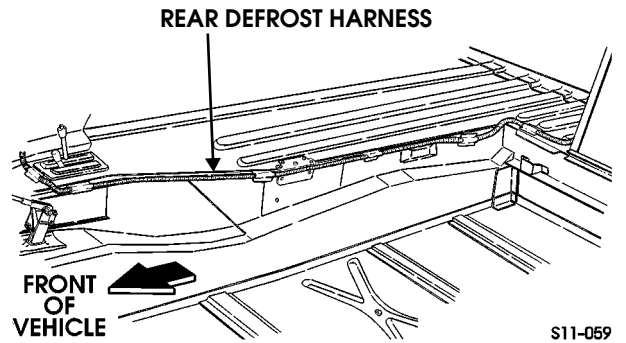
Rear Defrost Harness - Four Passenger Vehicle
